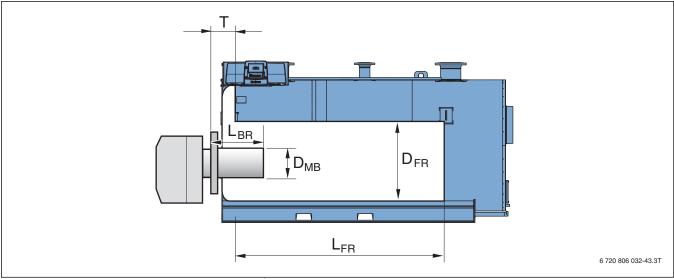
Dimensions, burner door and burner Uni 3000 F¹⁾
